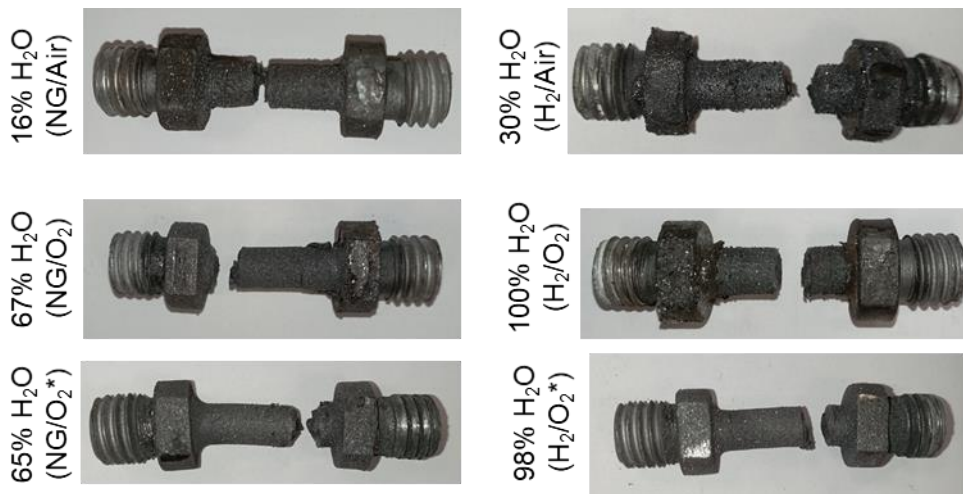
Appearance of the specimens after hot torsion tests to fracture for the material AMOB S235JR.
